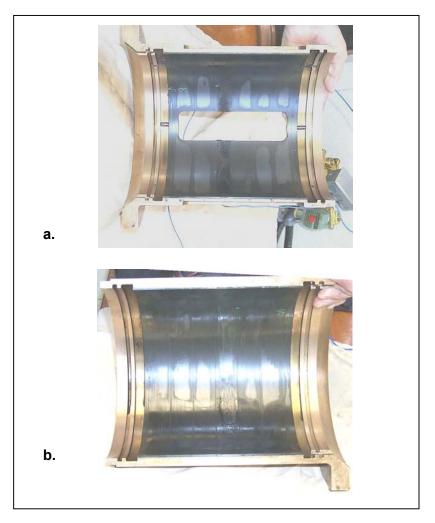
Damaged Mark 2 Vespel®-lined bearing (larger bore)a. bottom halfb. top half
